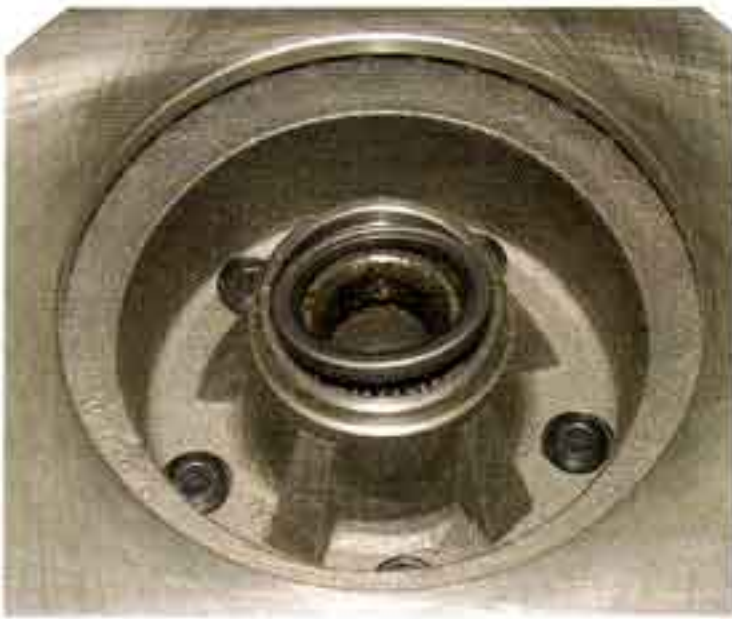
& 8b: With inner bearing in place, install the inner grease seal using a hammer and a flat block of wood. It will fit flush with the hub on the rotor when properly installed.
